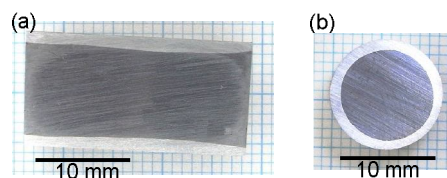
Typical pictures of (a) longitudinal-section and (b) cross-section of an extruded sample.
